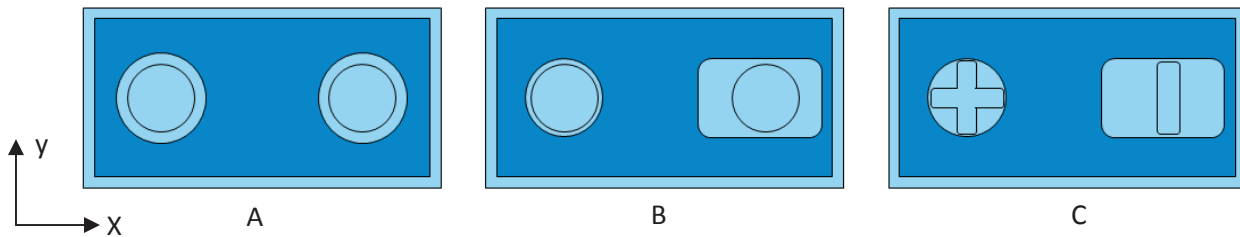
Interface between a component with two pins and a component with two holes. All 6 DOFs are to be constrained. In A) the design is ambiguous. In B) the design is improved. In C) the design has been further optimised for robustness, thereby reducing the variance of the holding force.
